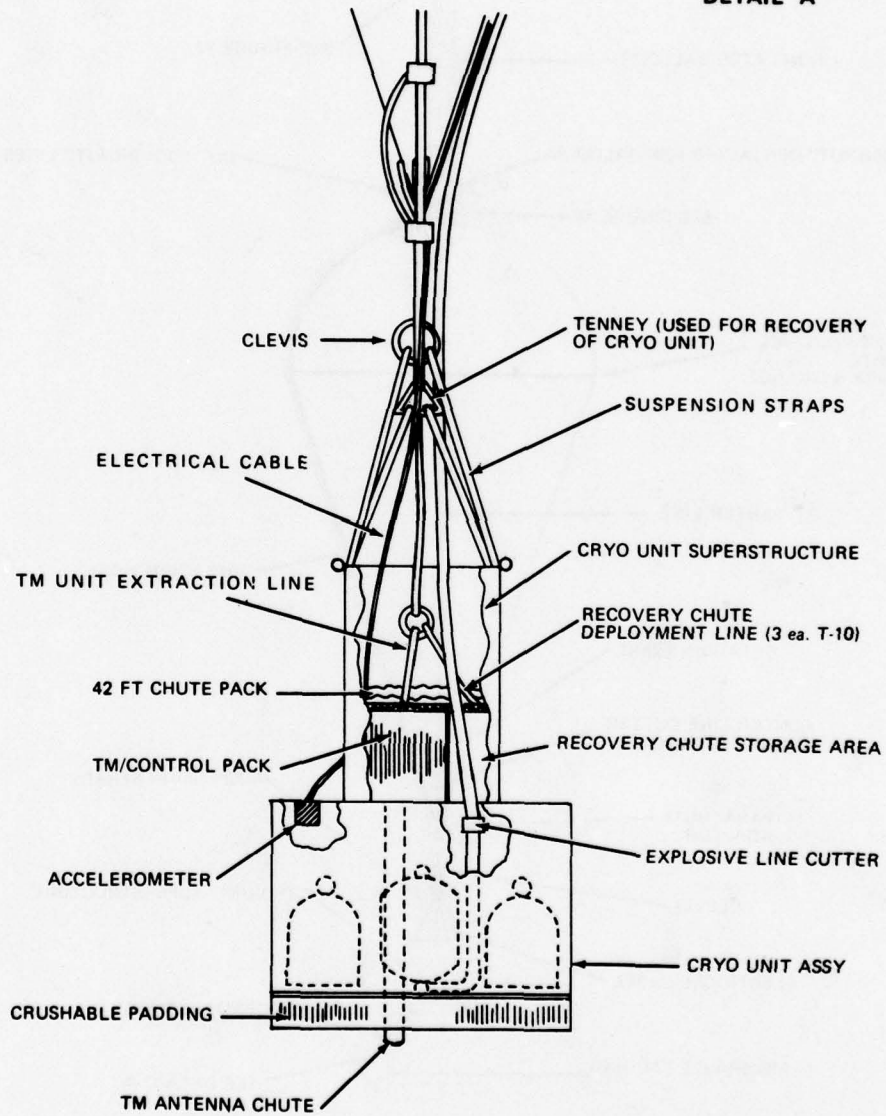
Outline Drawing ALBS Prototype Configuration - Detail A
